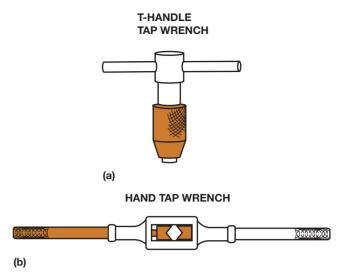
(a) A T-handle is used to hold and rotate small taps. (b) A tap wrench is used to hold and drive larger taps.
